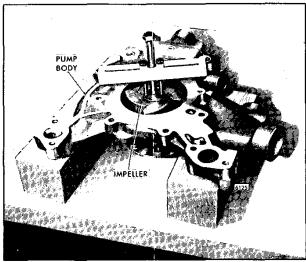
Removing Water Pump Impeller Using Tool J 29190-A
